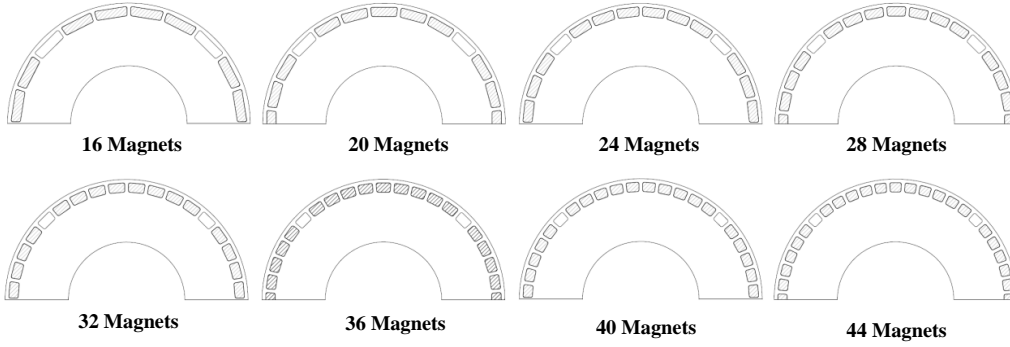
Different magnet configurations in the IPM bearingless machine rotor.
